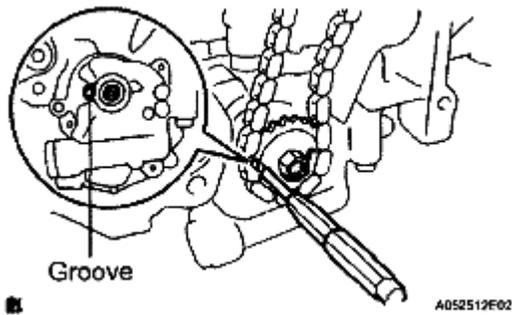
Aligning Adjusting Hole Of Oil Pump Driven Sprocket
